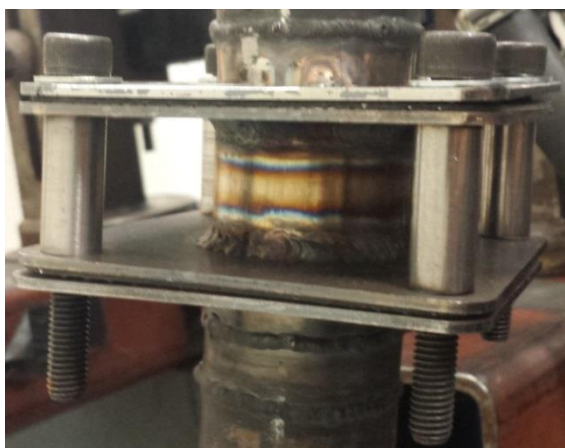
A straight tube spacer which can replace the exhaust brake in case it is uninstalled.
